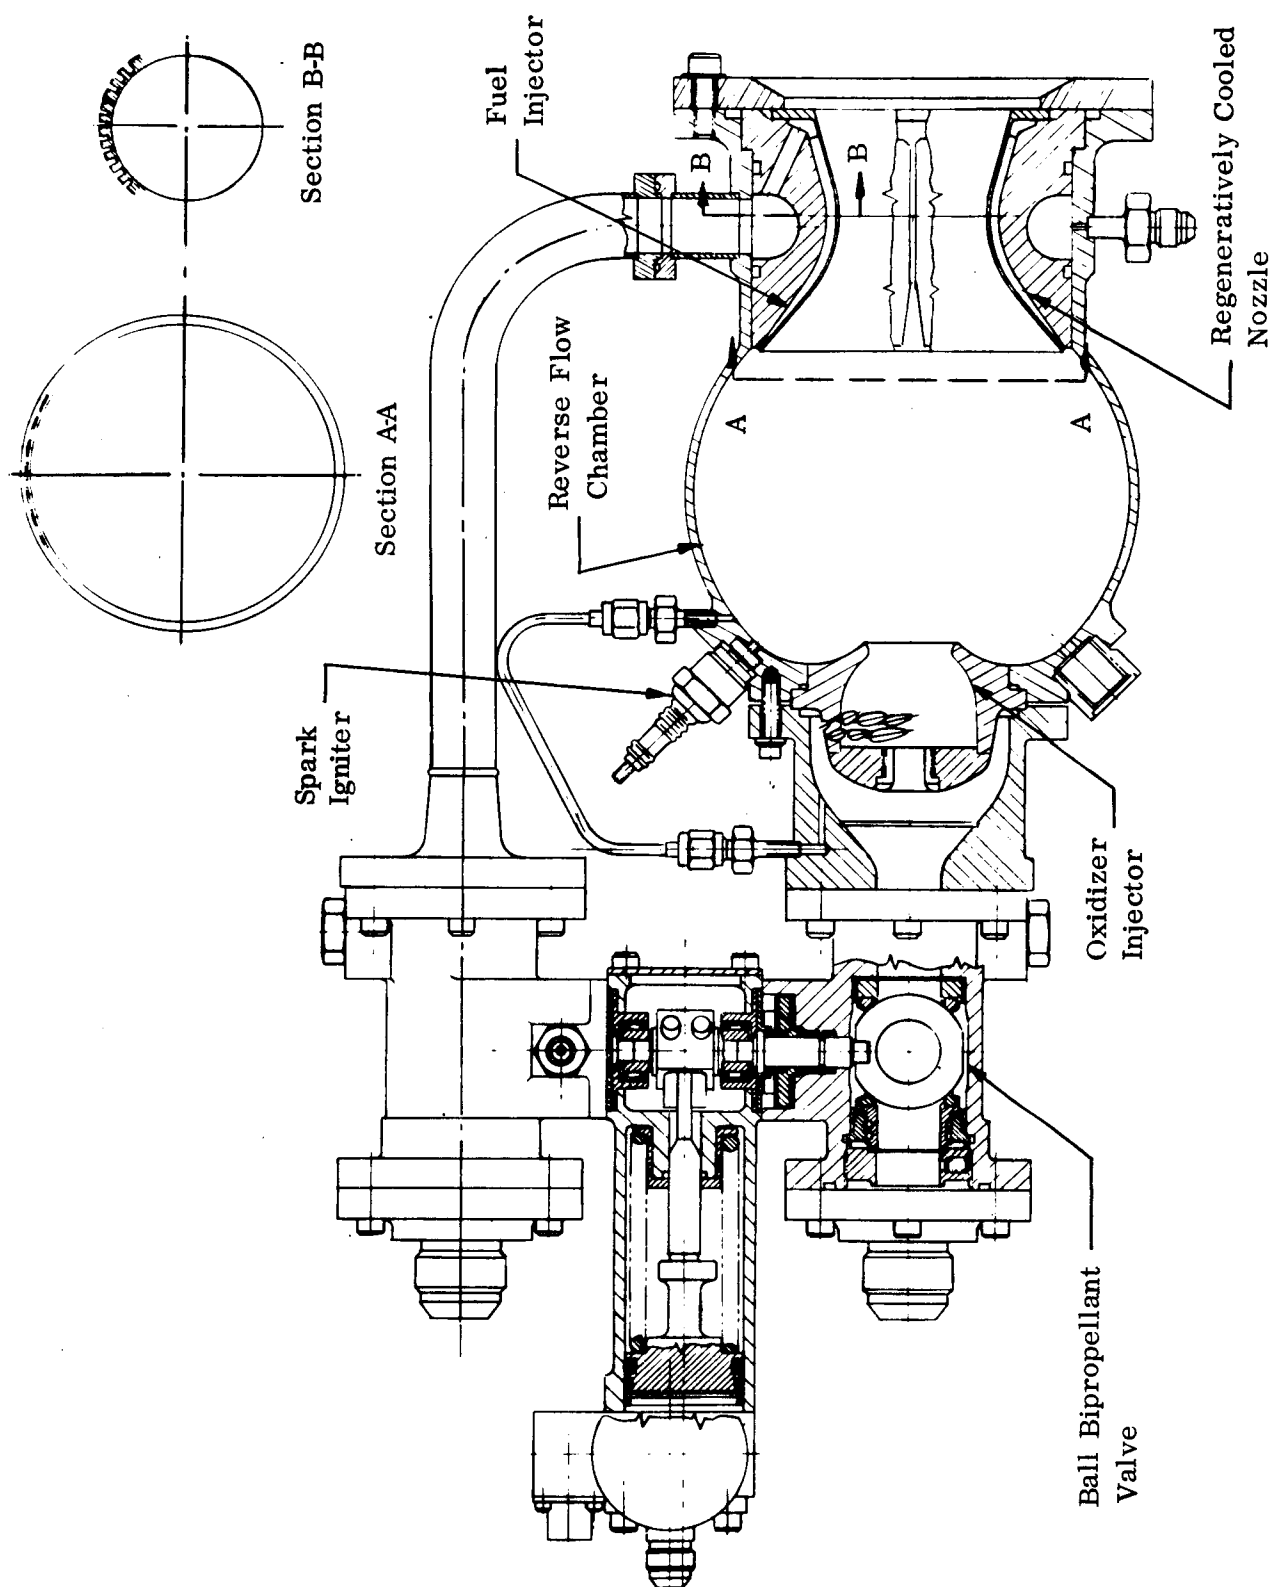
1000-lb (4448N) Thrust Reverse Flow Engine Assembly
